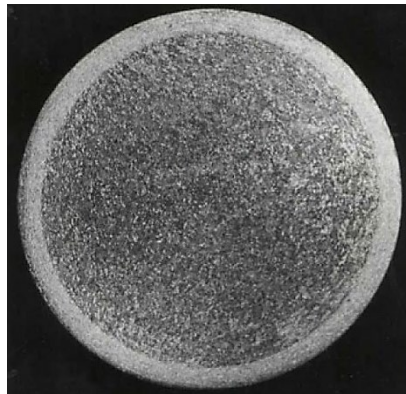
Macrostructure of the primary workpiece with a large crystalline rim.
